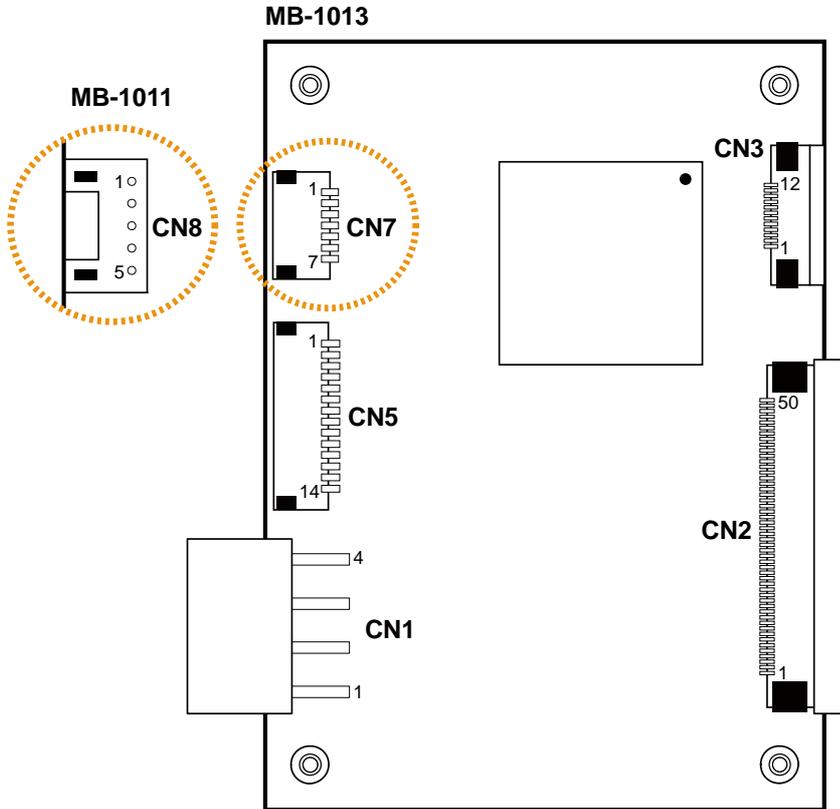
MB-1011 & MB-1013 Printer Board Component Locations
